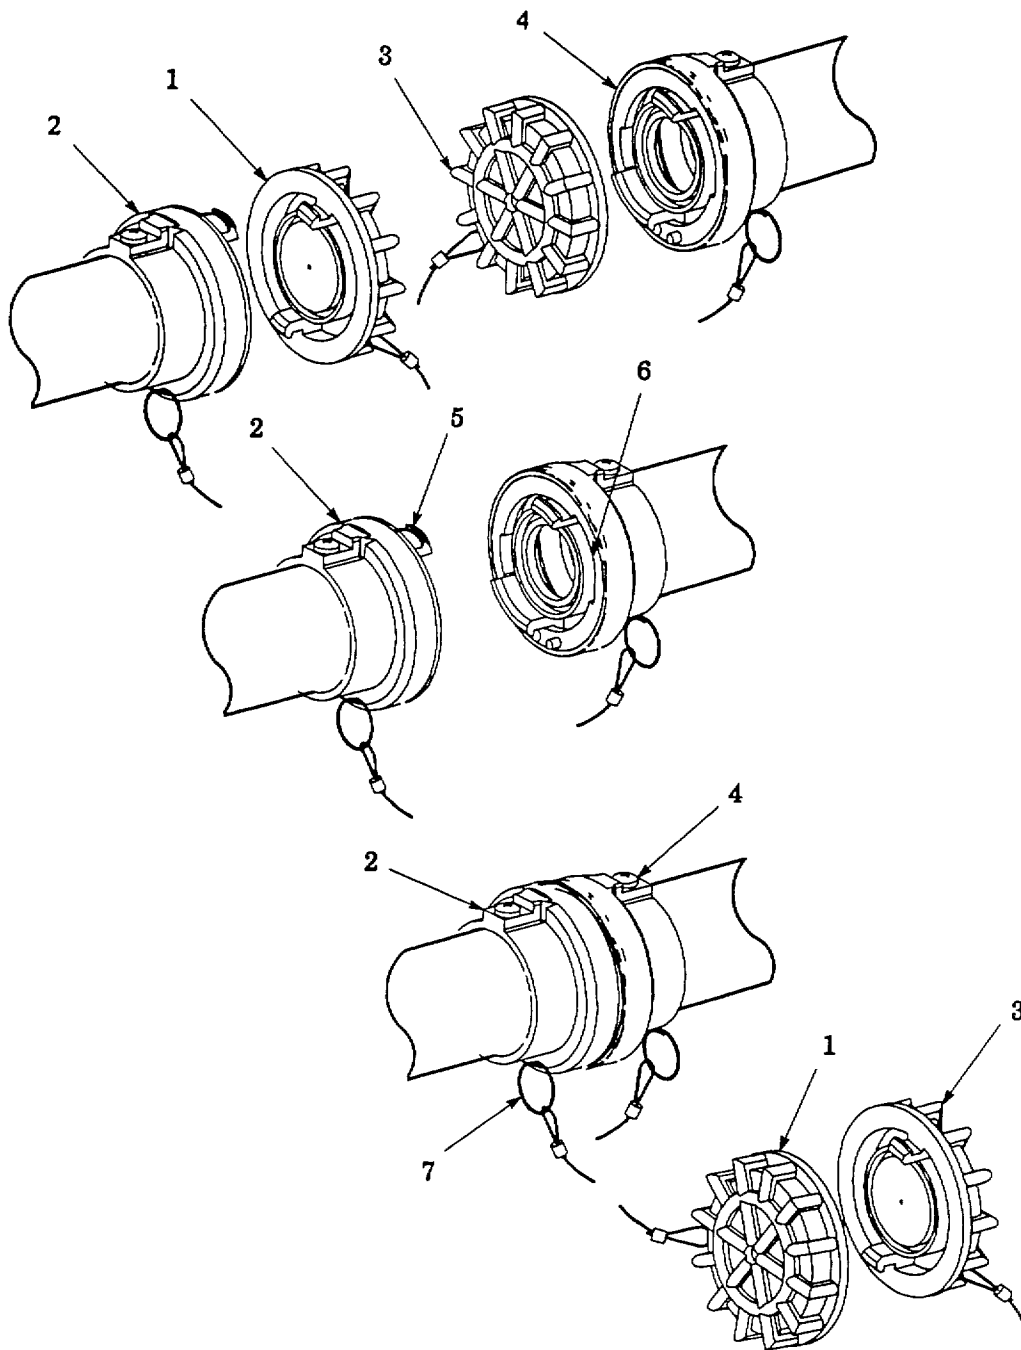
Non-valved Dry Break Coupling Disconnection.
